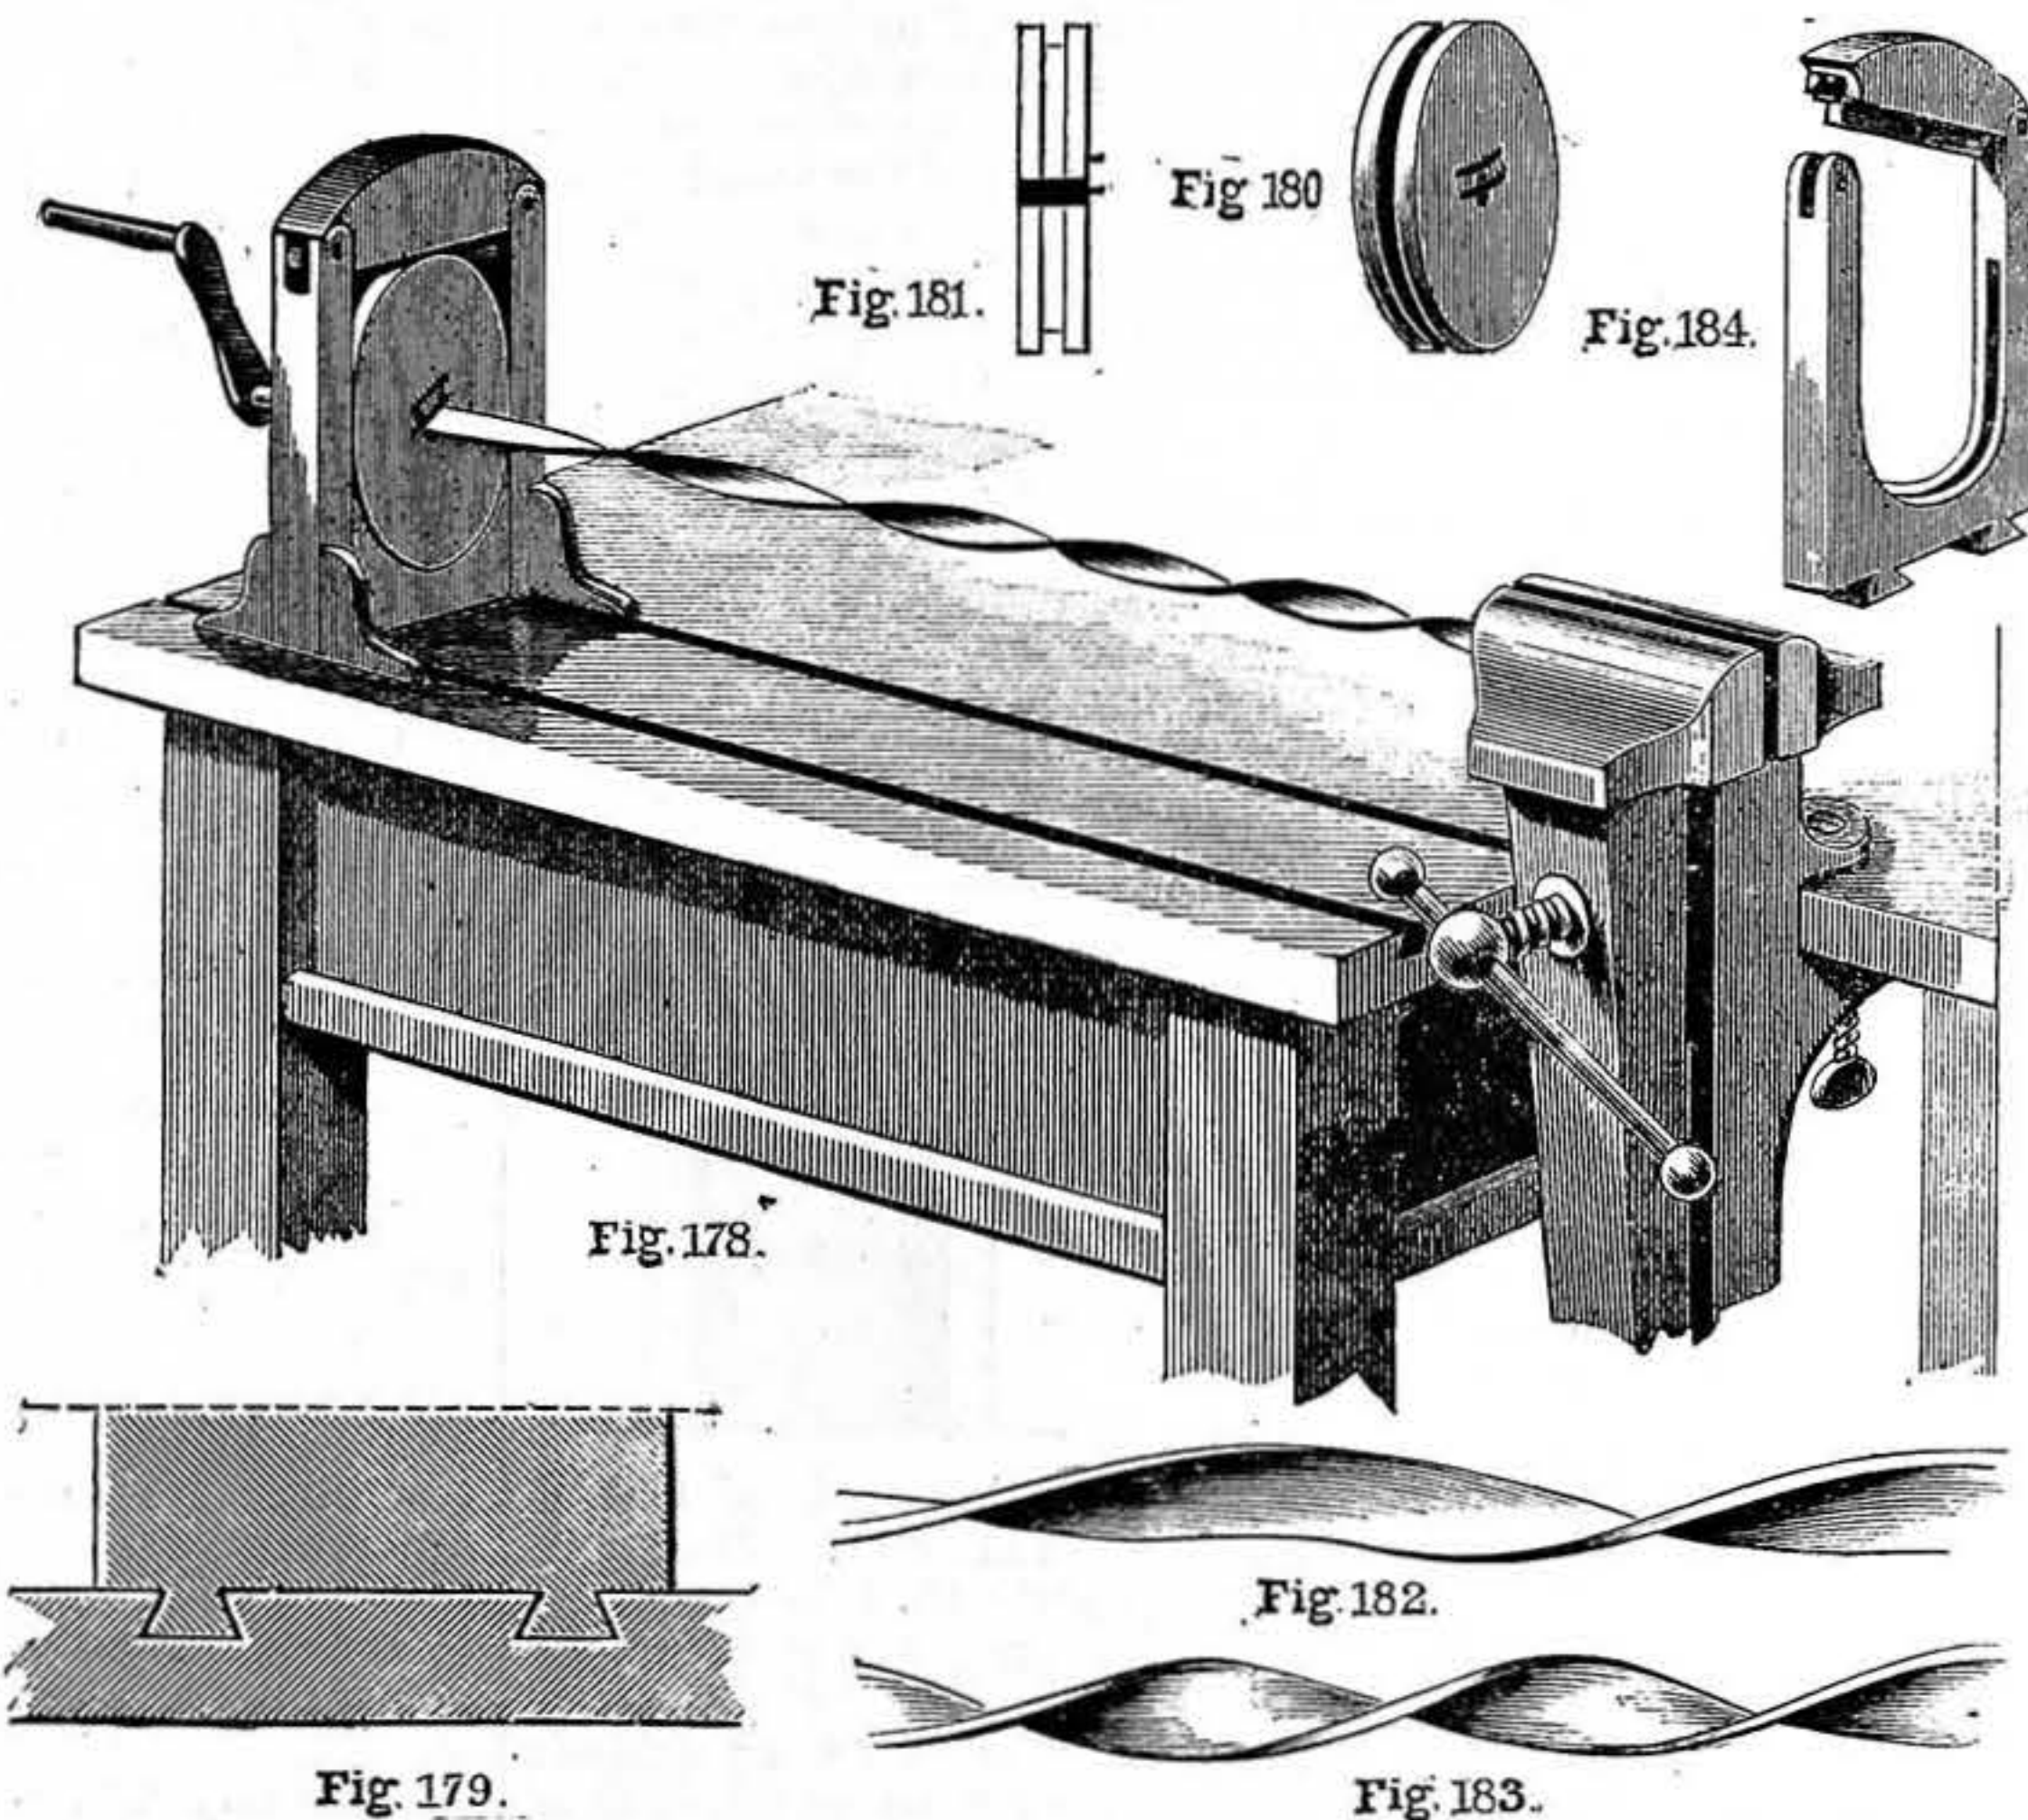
Machine for twisting Iron Ribbons. Fig. 179.—Elevation or Section of Bottom Part of Machine and Bench, showing Dovetails, etc. Fig. 180.—View of Wheel of Machine. Fig. 181.—Section of Wheel. Figs. 182, 183.—Appearance of Ribbon or Lathing whilst being twisted. Fig. 184.—Standard of Machine.
